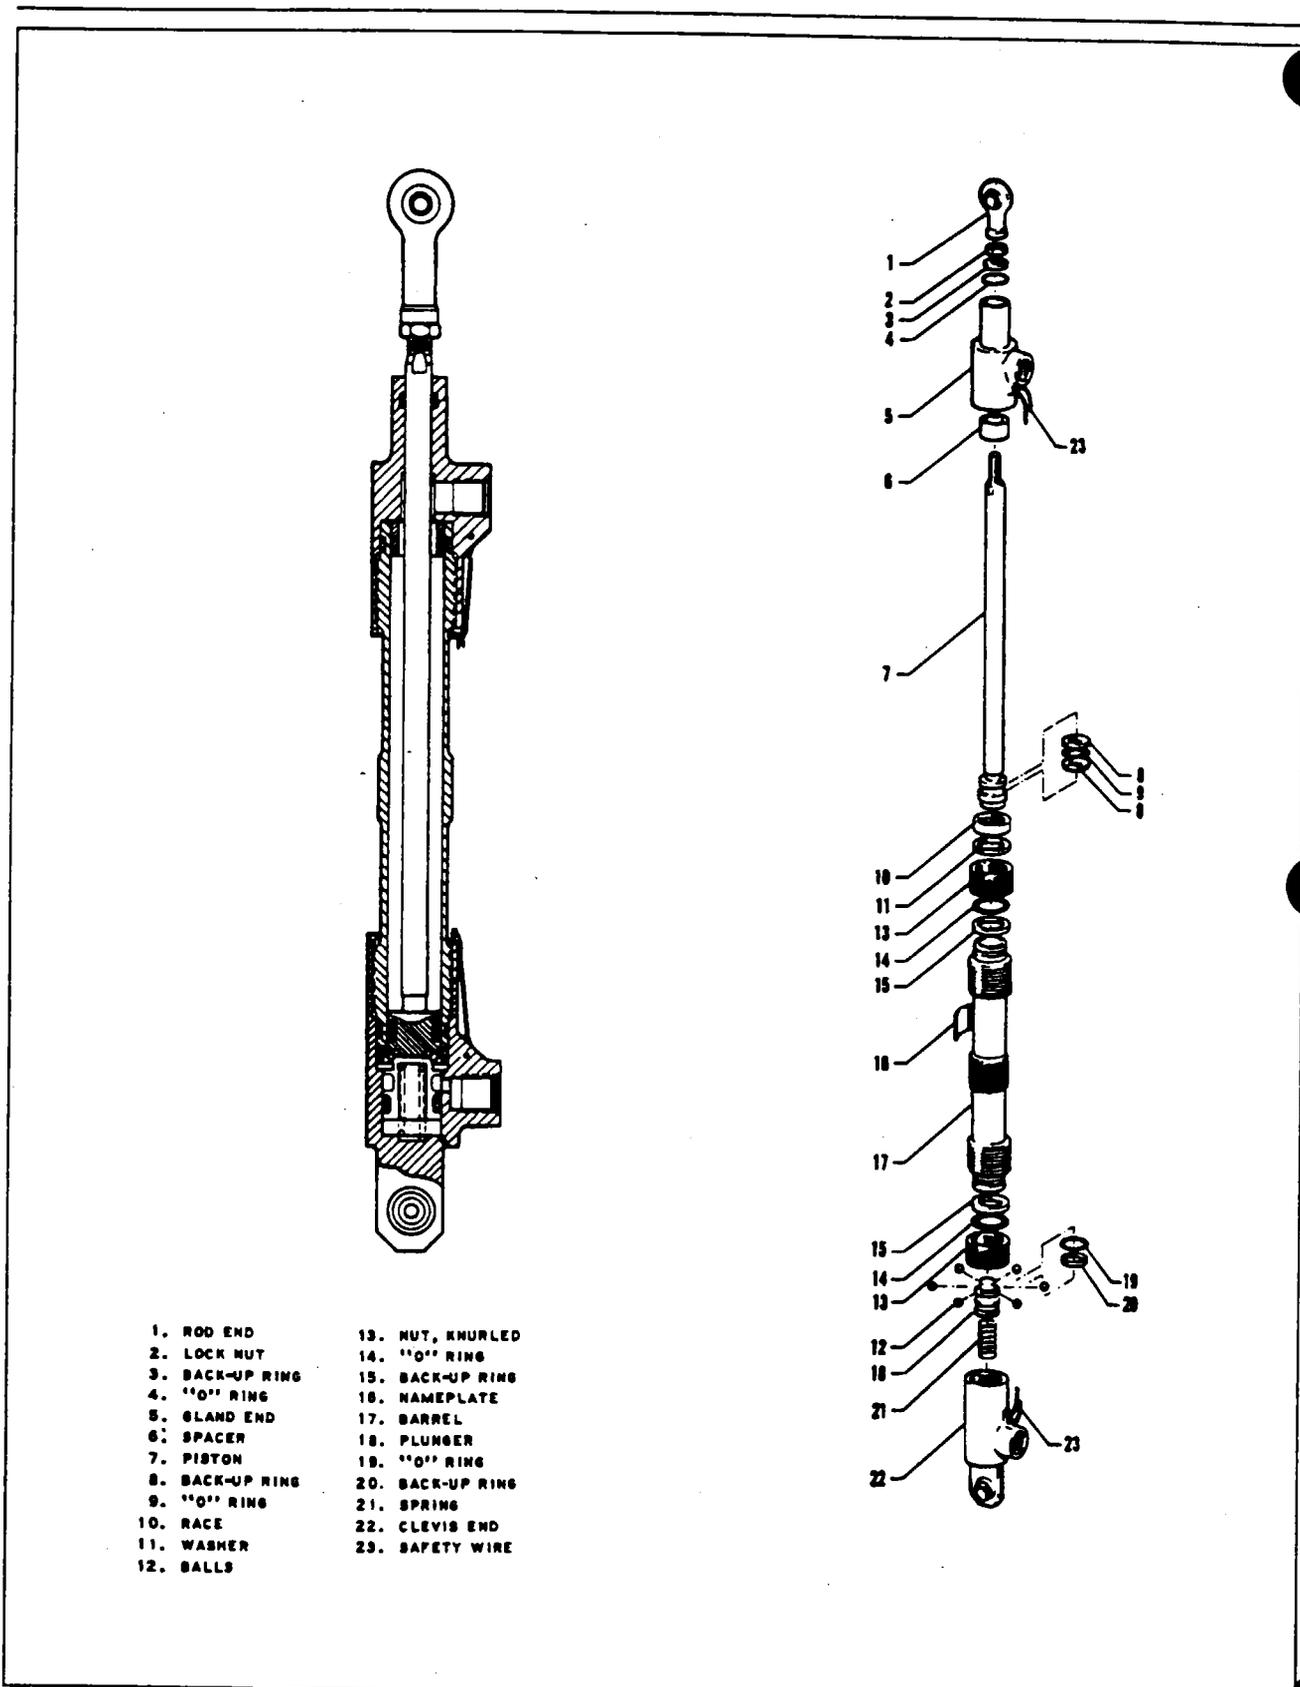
Gear Door Actuating Cylinder (Ozone)
